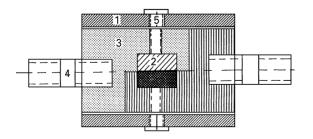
The shear testing fixture. (1) Casing pipe, (2) specimen, (3) holder, (4) bolt, (5) screw.
